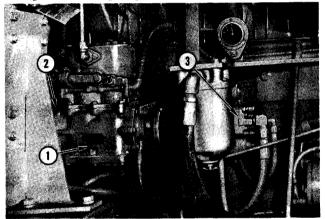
AIR COMPRESSOR MOUNTING 3. P.T. Fuel Pump 2. Timing Gear Housing 1. Compressor
